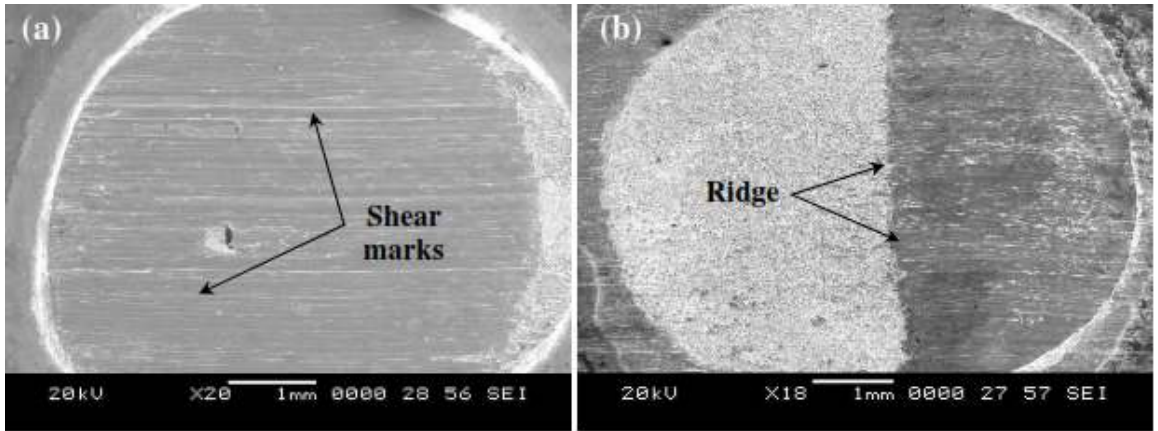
SEM micrographs of the fractured surfaces of Sn-3Ag-0.5Cu solder (a) smooth Cu substrate joint (b) rough Cu substrate joint
